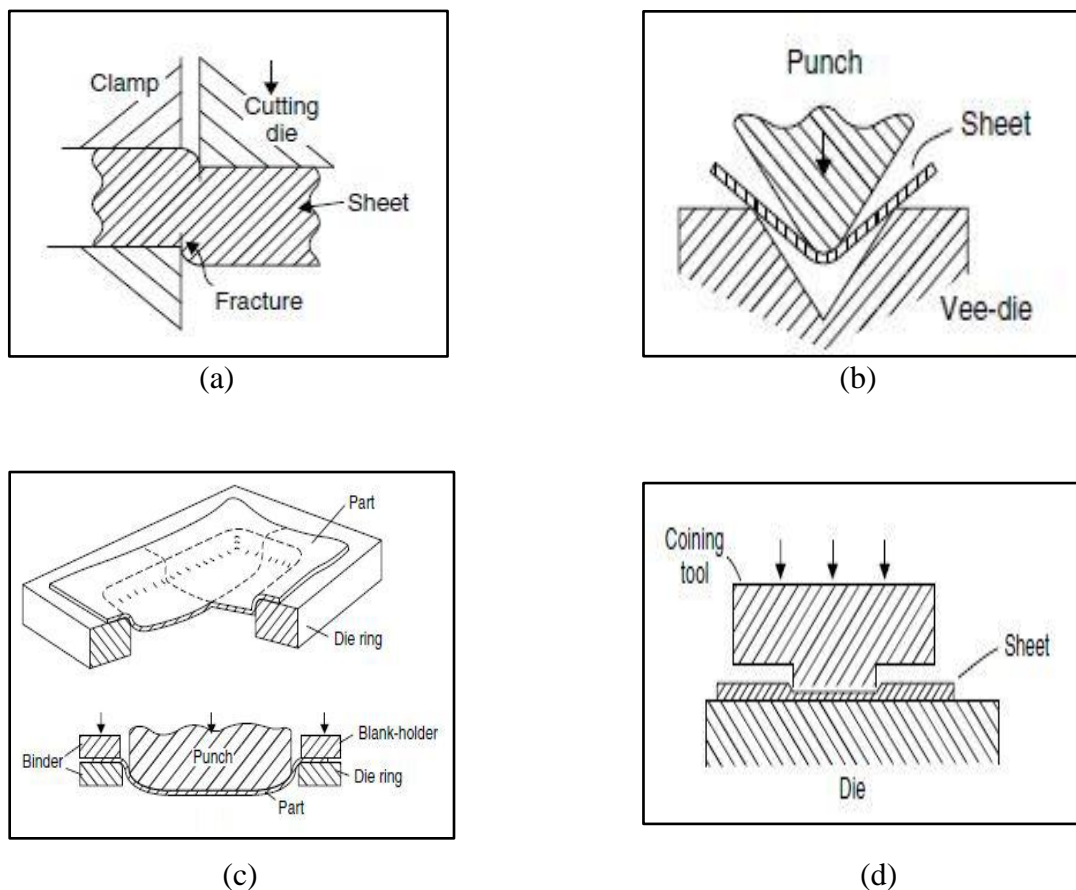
Example of sheet metal forming: (a) Cutting process, (b) Bending process, (c) Stamping or draw die, (d) Coining process.
